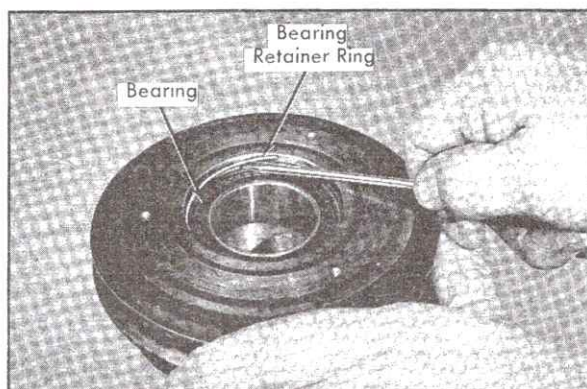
Removing Pulley Bearing Retainer Ring
